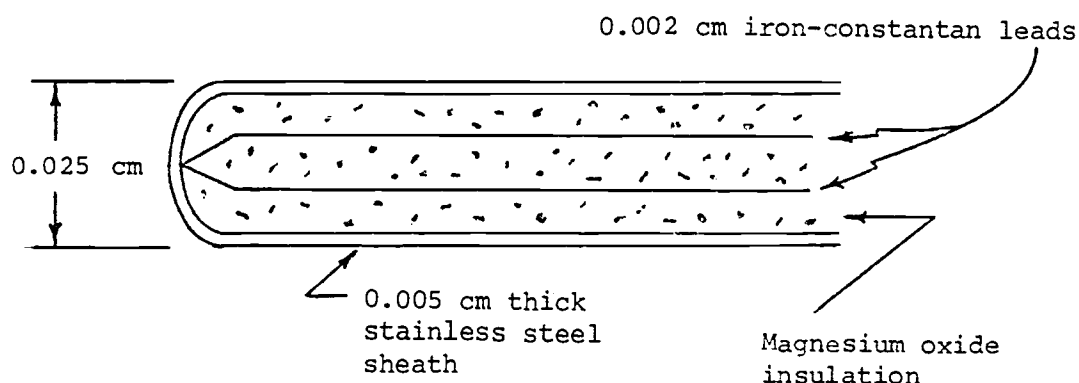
Cross-Sectional View of Diffusion Tube Thermocouple Probe
